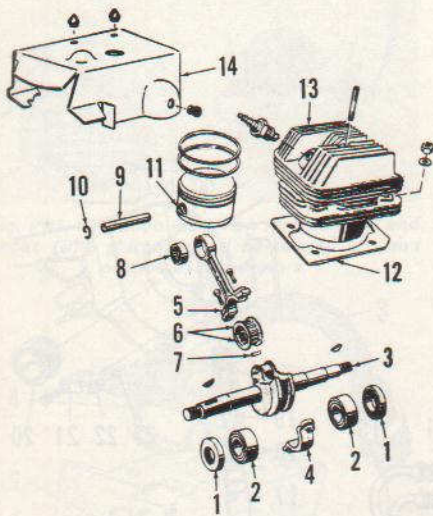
Exploded view showing crankshaft, cylinder and associated parts.
